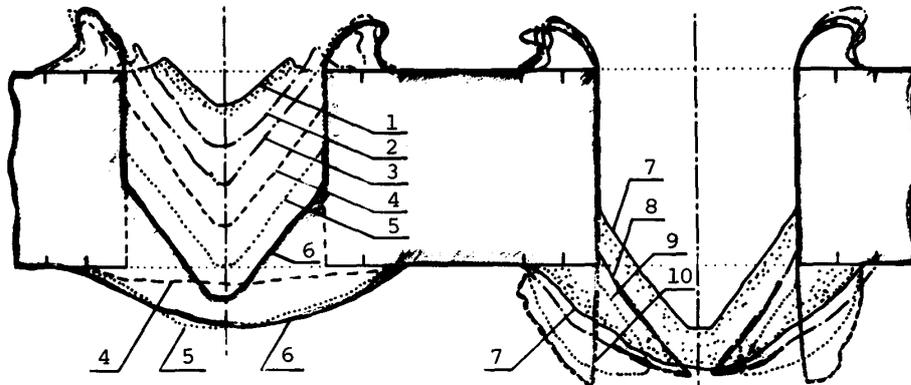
Sectional shape of lead plate in the difference of model tool feed
